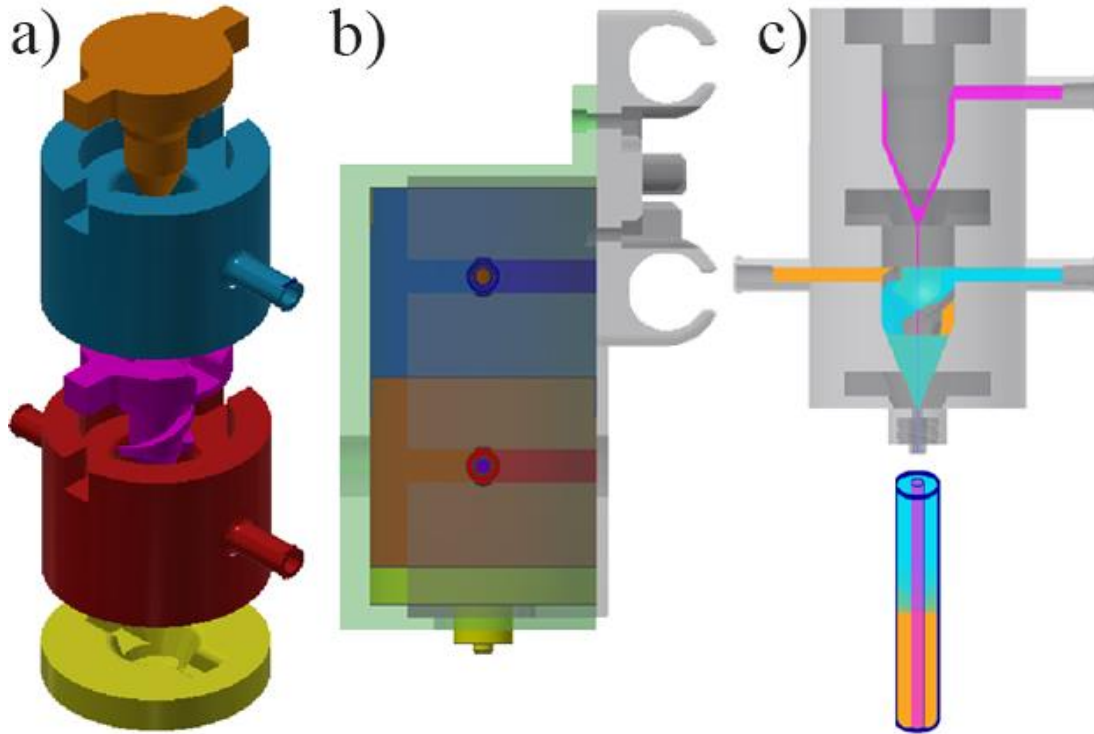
Printhead Overview a) Exploded View b) Side View with the Carriage c) Bio-ink Path
